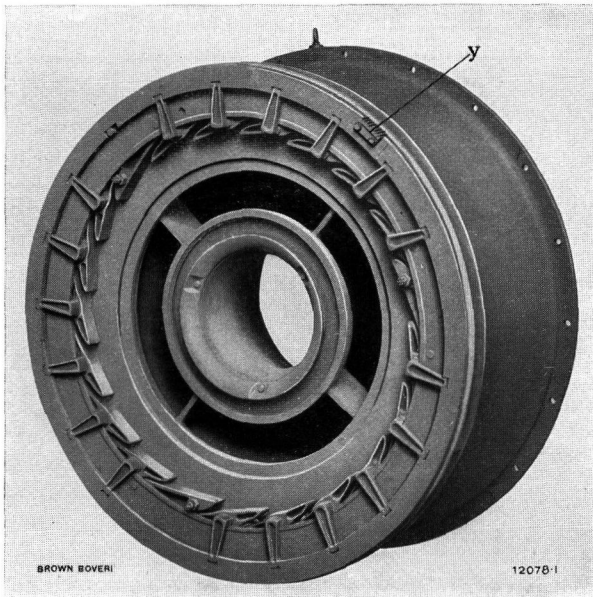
Intake of a centrifugal scavenging blower, showing movable diffuser.
